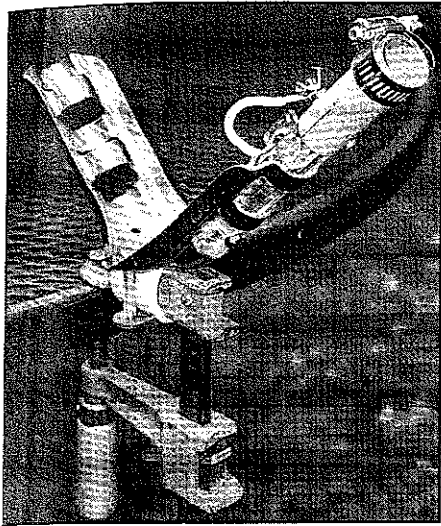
Two flagpole brackets are attached to one bar clamp. One of them must have some of its mounting plate cut away to fit "inside" the other.
